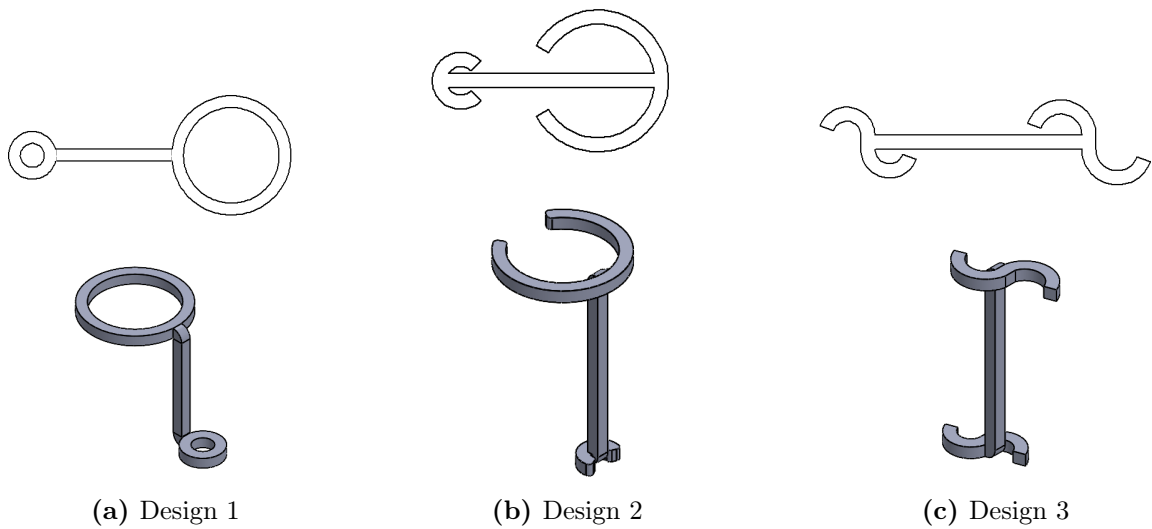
The three initial designs for laser cutting manufacturing method before and after bending. Design 1 has annular head and foot with a straight shaft; Design 2 consists of C-shaped head and foot with a straight shaft; Design 3 includes S-shaped head and foot with a straight shaft.
